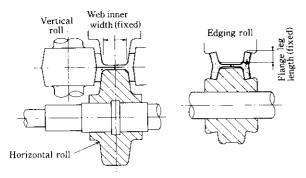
Conventional rolling method for H-shapes by universal and edging mill
